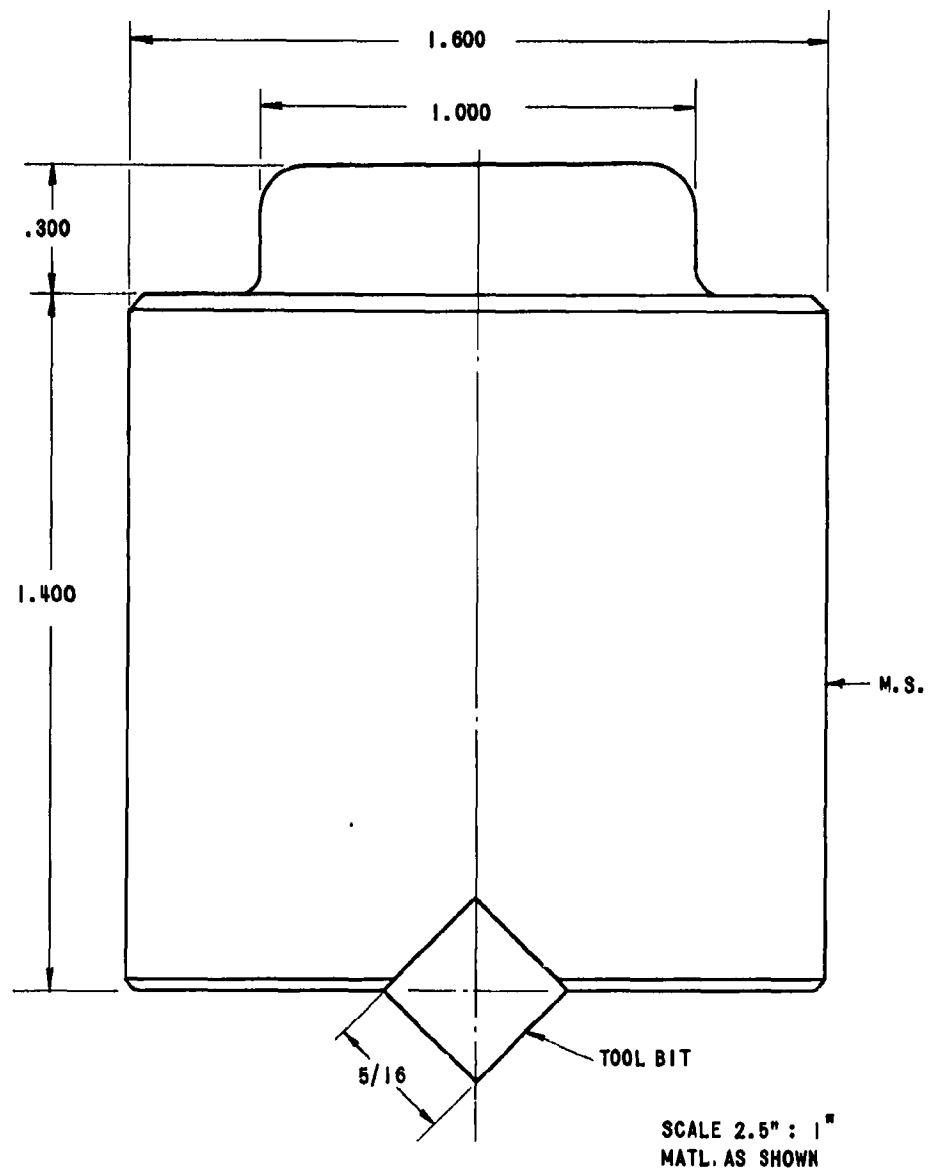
LOWER PLUNGER CARRYING COLUMN KNIFE EDGE.
